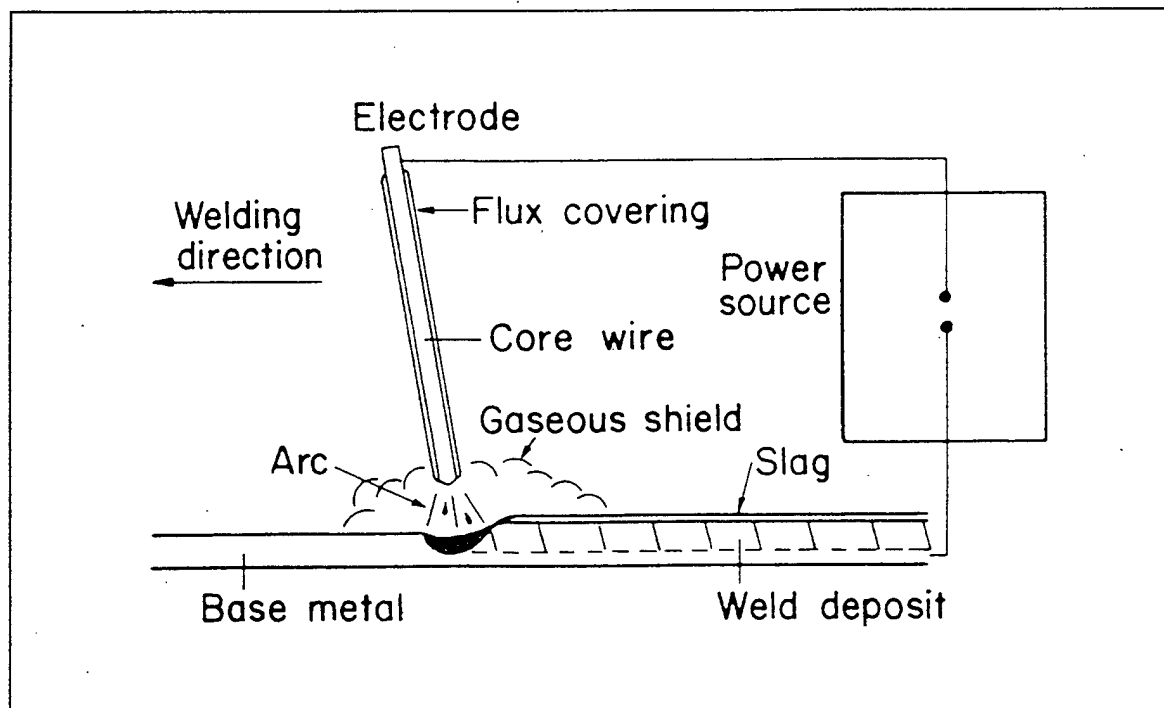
Sketch of the shielded metal arc welding process.
